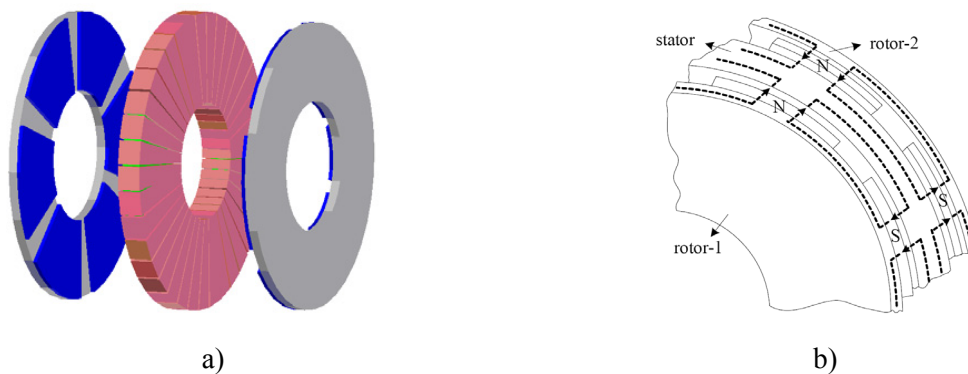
a) Double-rotor-single-stator axial flux Torus type non-slotted surface mounted PM machine configuration, b) 3D Flux directions of the TORUS machine, [Ayd 2004].
